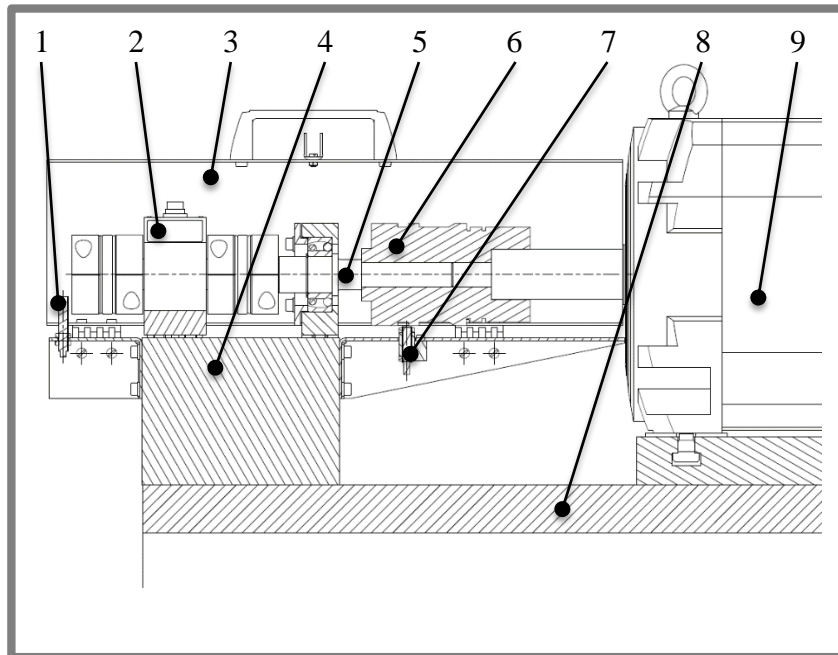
Drivetrain assembly, 1: rotational speed sensor, 2: torque sensor, 3: casing, 4: small table for drivetrain, 5: connecting shaft, 6: safety clutch, 7: safety clutch limit switch, 8: drivetrain frame, 9: motor
